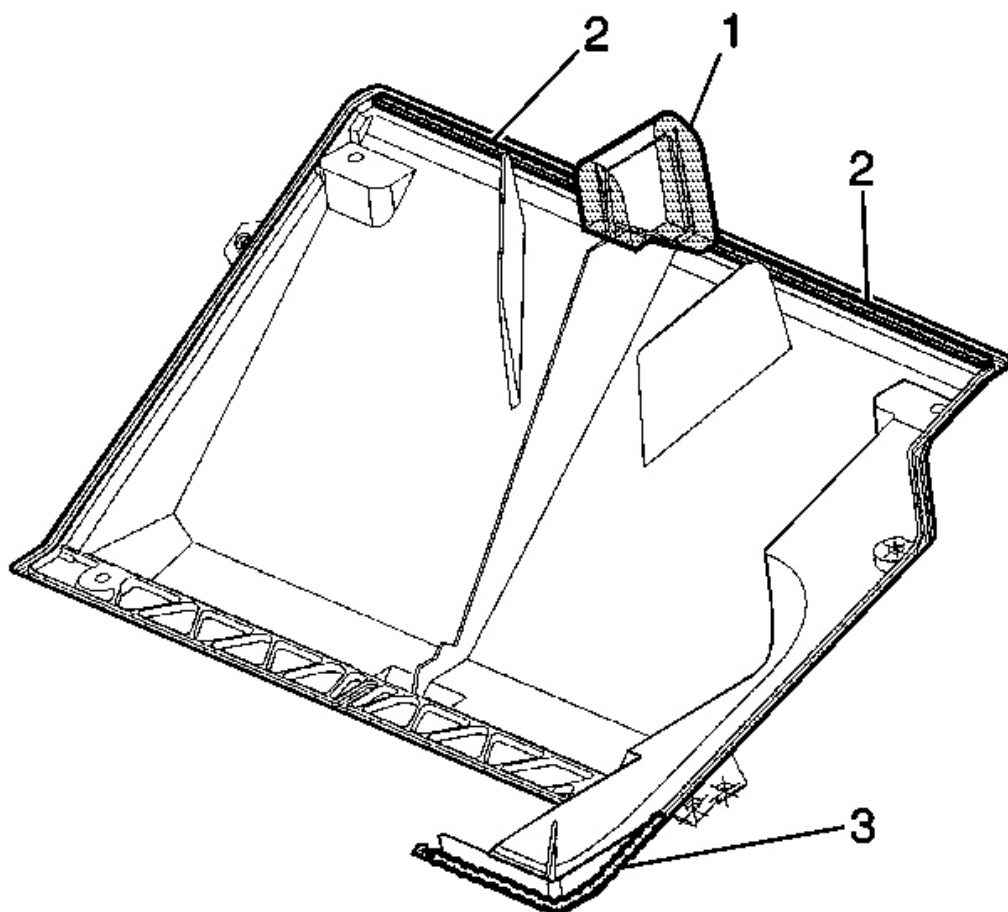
Heater Core Cover Cavity Seals (1,2,3)
